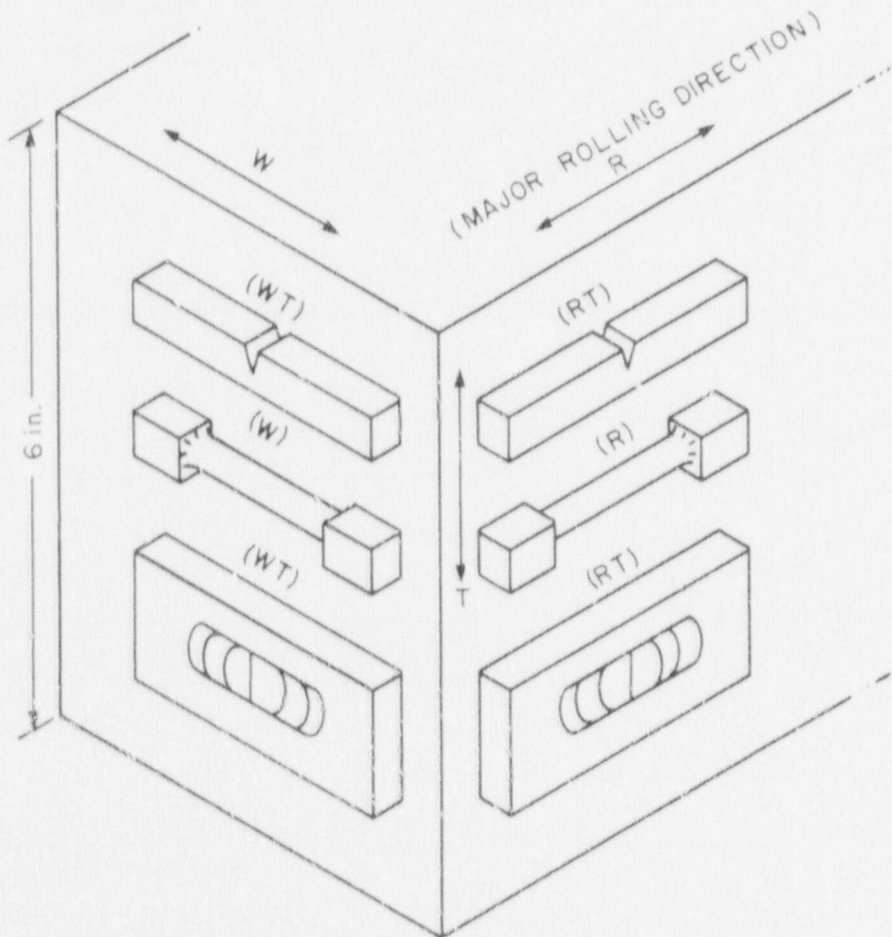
Specimen orientation notation for HSST plates 03 and 04 and base plate from HSST weldment W57, showing tensile, Charpy V, and drop-weight specimens (1 in. = 25.4 mm).
